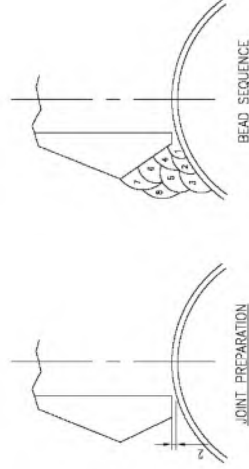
Alignment and welding practices for branch nozzle with O-let fitting
